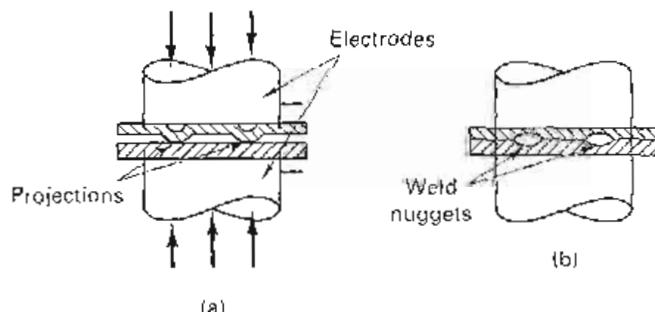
Principle of projection welding (a) prior to application of current and pressure and (b) after formation of the welds.
